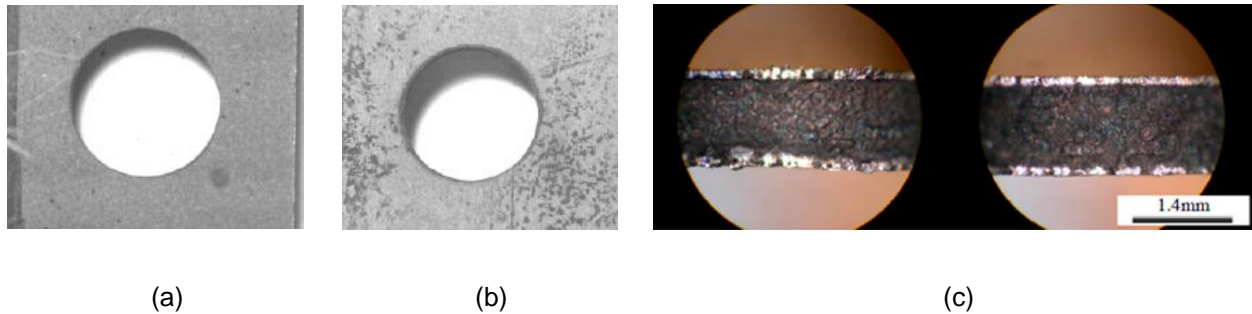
Top Surface (a), Bottom Surface (b), and Section View (c) of EDM holes in TiGr laminate [20]
